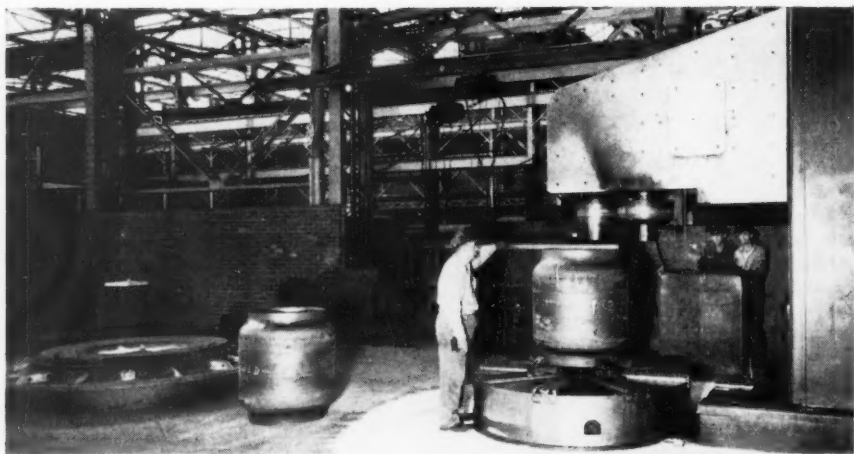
View of company-designed distributor mill. Floor furnace may be seen at the left. Workman is shown checking O.D. of distributor shell.
